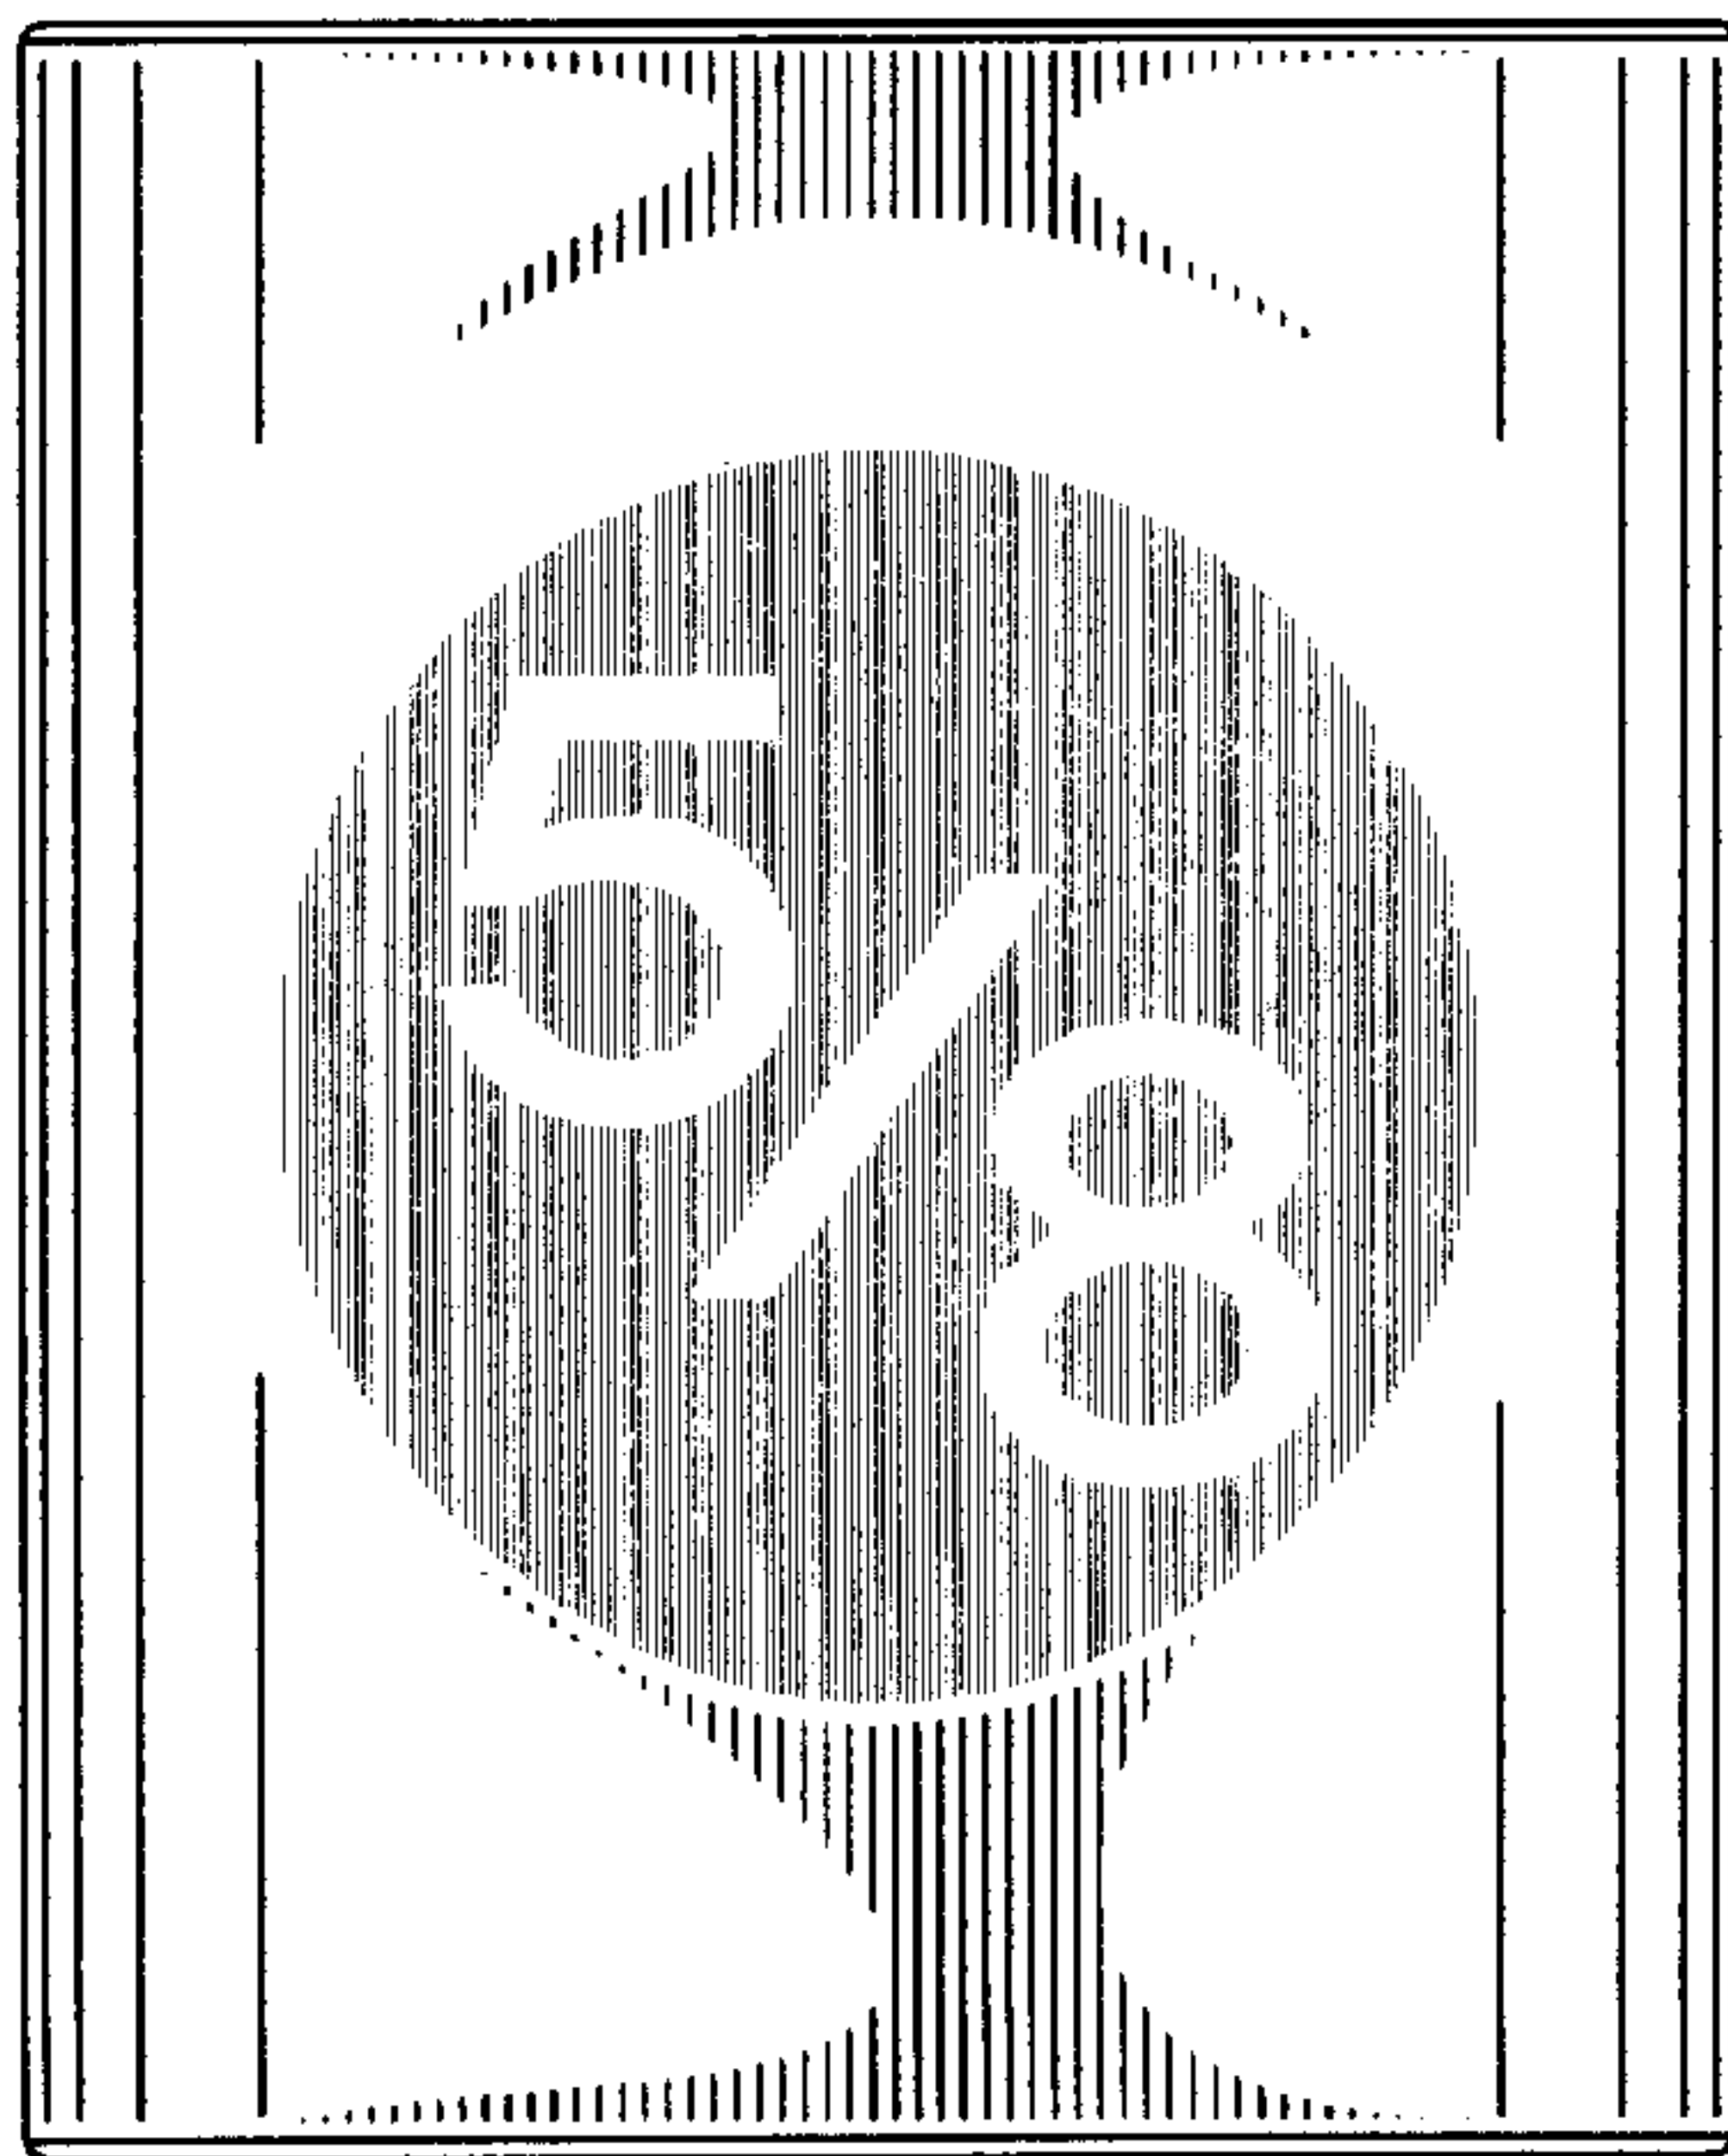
is a bottom view of the laser etched socket illustrated in FIG. 1.
